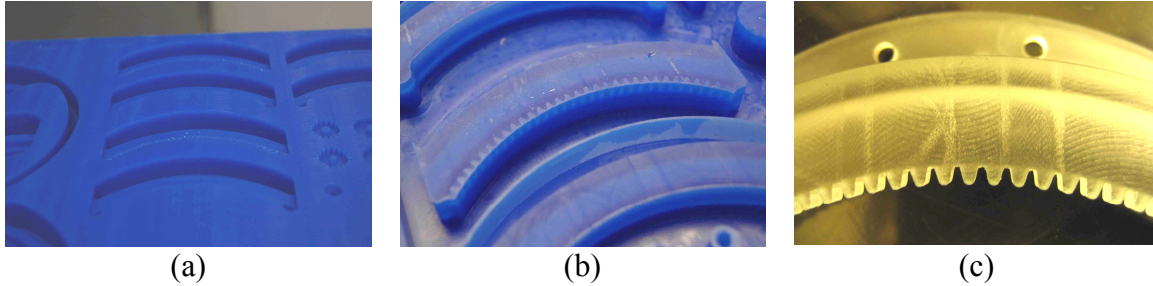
Slider Cavity (a), After 2<sup>nd</sup> Machining Step (b), Close Up of Gears (c).
